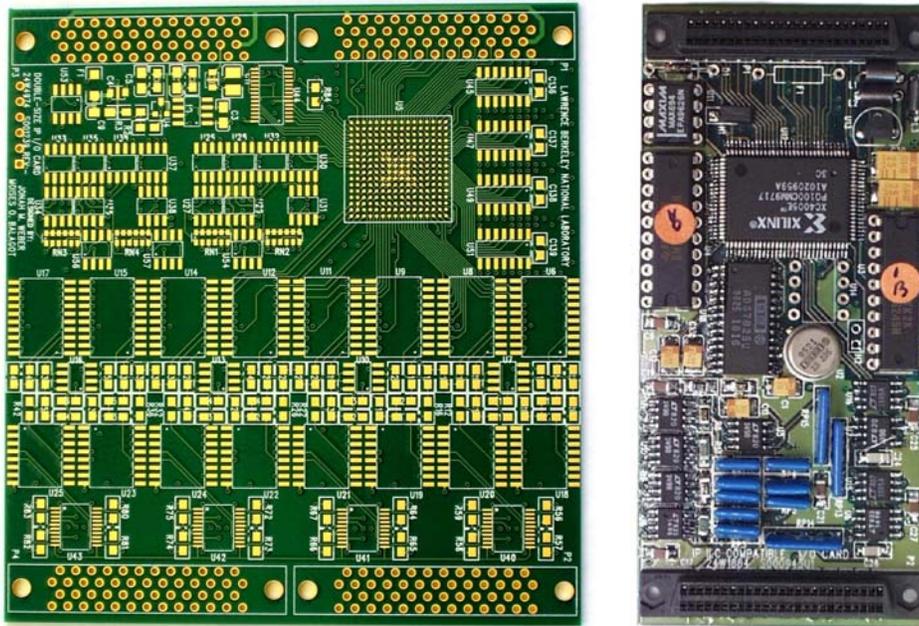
The IP2 Module top side (left) and the IP Module top side (right).
